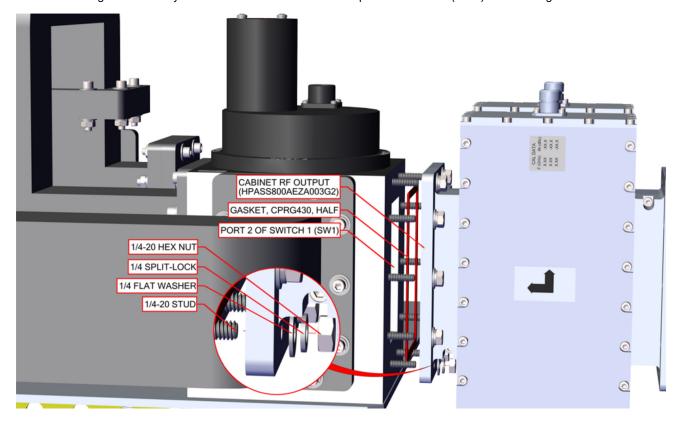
Connect Cabinet 1 (HPASS800AEZA003G2) to Switch Assembly
